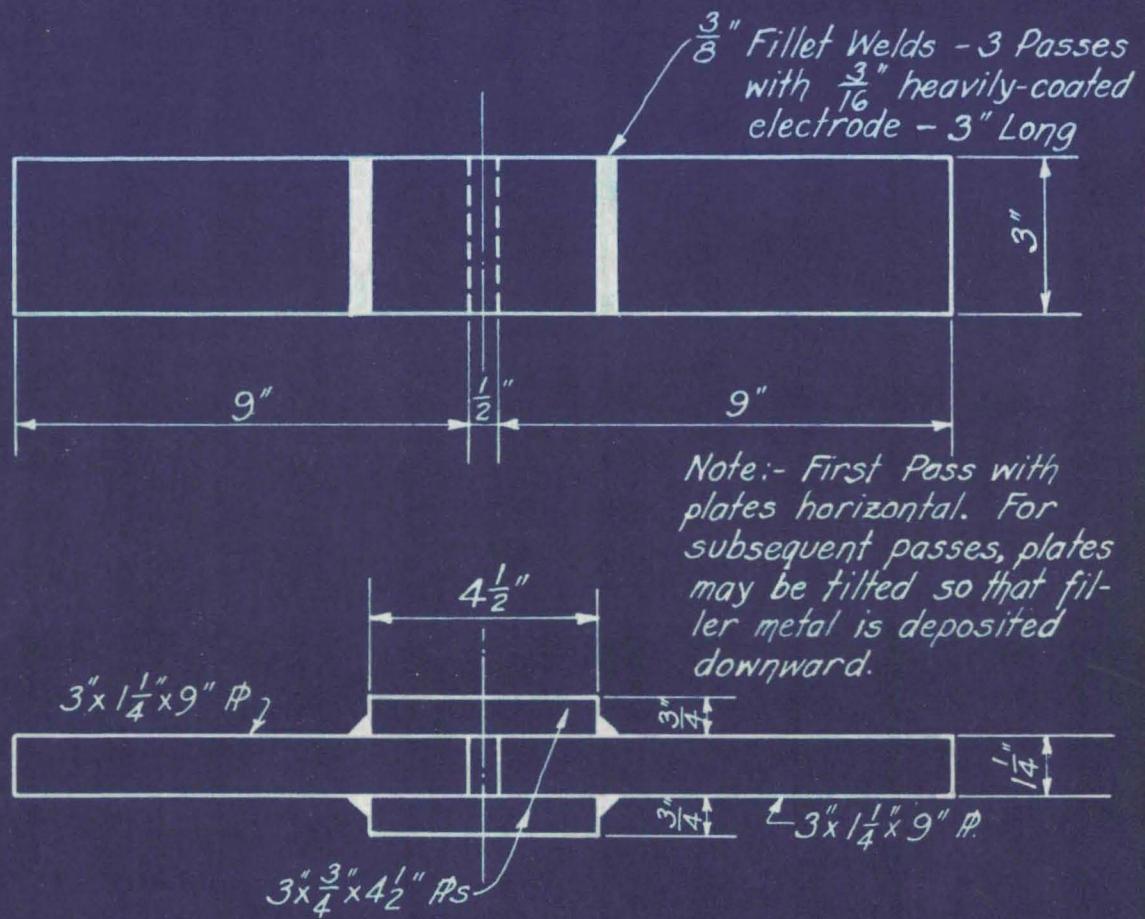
MODIFIED QUALIFICATION SPECIMEN FOR HEAVILY-COATED ELECTRODE WELDS.
